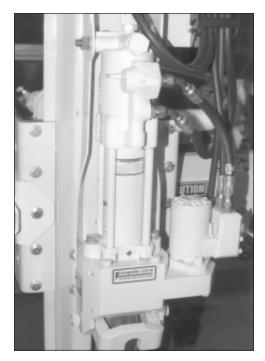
Hammer member, rotation member, and hydraulic motor reattached to hammer cradle.
